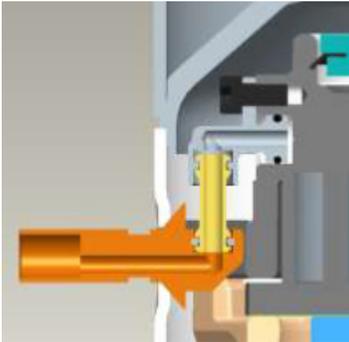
O-rings composing the injection inside compressor models ZF*KA
